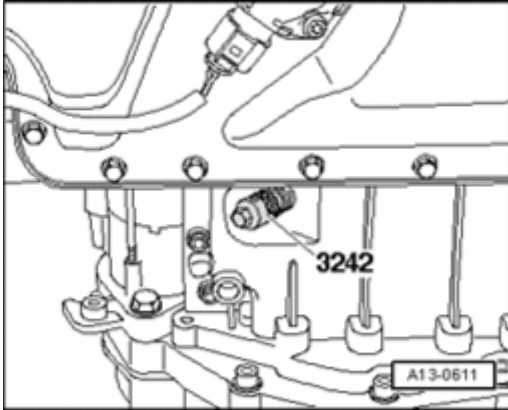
Removing/Installing Crankshaft Holder 3242 Into Hole
